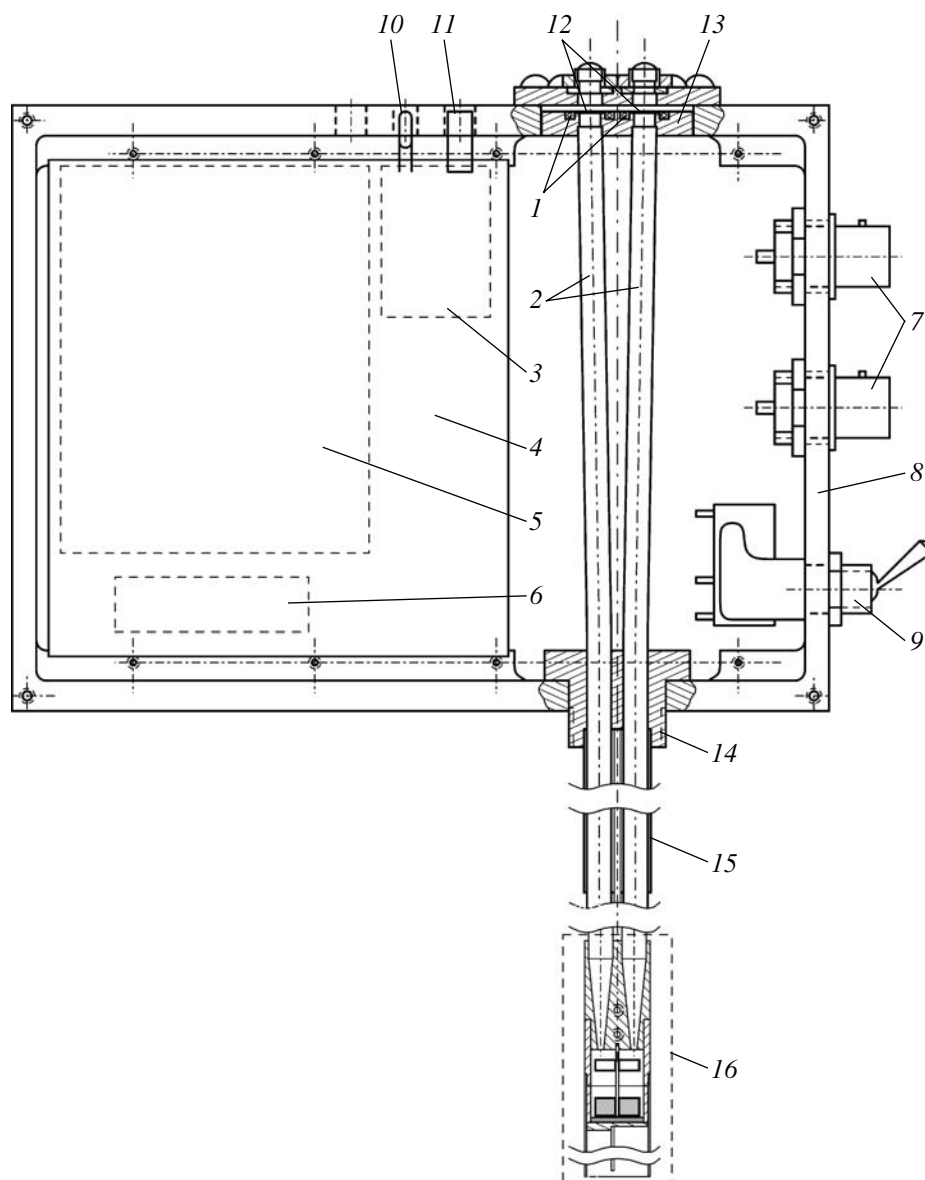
Design of the insert: (1) vacuum seal (O-ring), (2) optical channels, (3) battery-charging unit, (4) board, (5) assembly of accumulator batteries, (6) unit for adjusting the bias voltage across crystals, (7) outputs, (8) case, (9) switch, (10) LED for indicating the charge of the batteries, (11) connector for charging the batteries, (12) entrance windows, (13) upper flange, (14) bottom flange, (15) 11-mm-diameter tube for the neck of the portable Dewar flask, and (16) low-temperature part.
